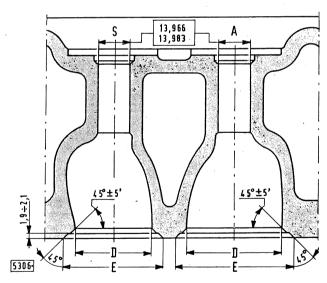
Dimensions of intake and exhaust valve seats and of valve guides in cylinder head.
